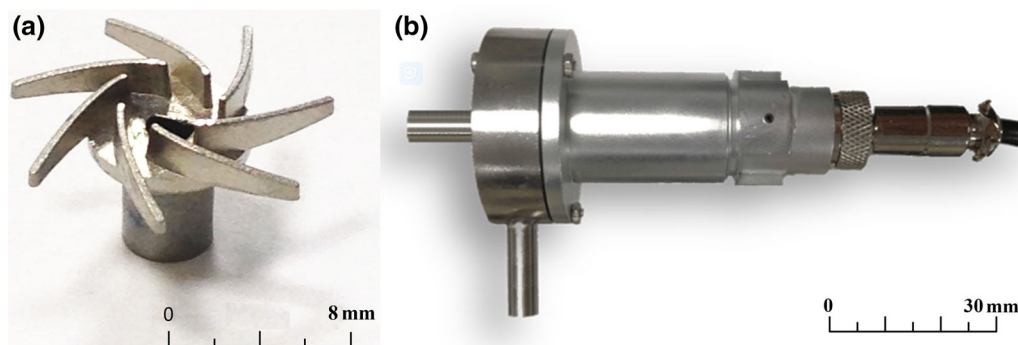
(Color online) The minipump prototype. a The fabricated impeller, b the minipump assembly
